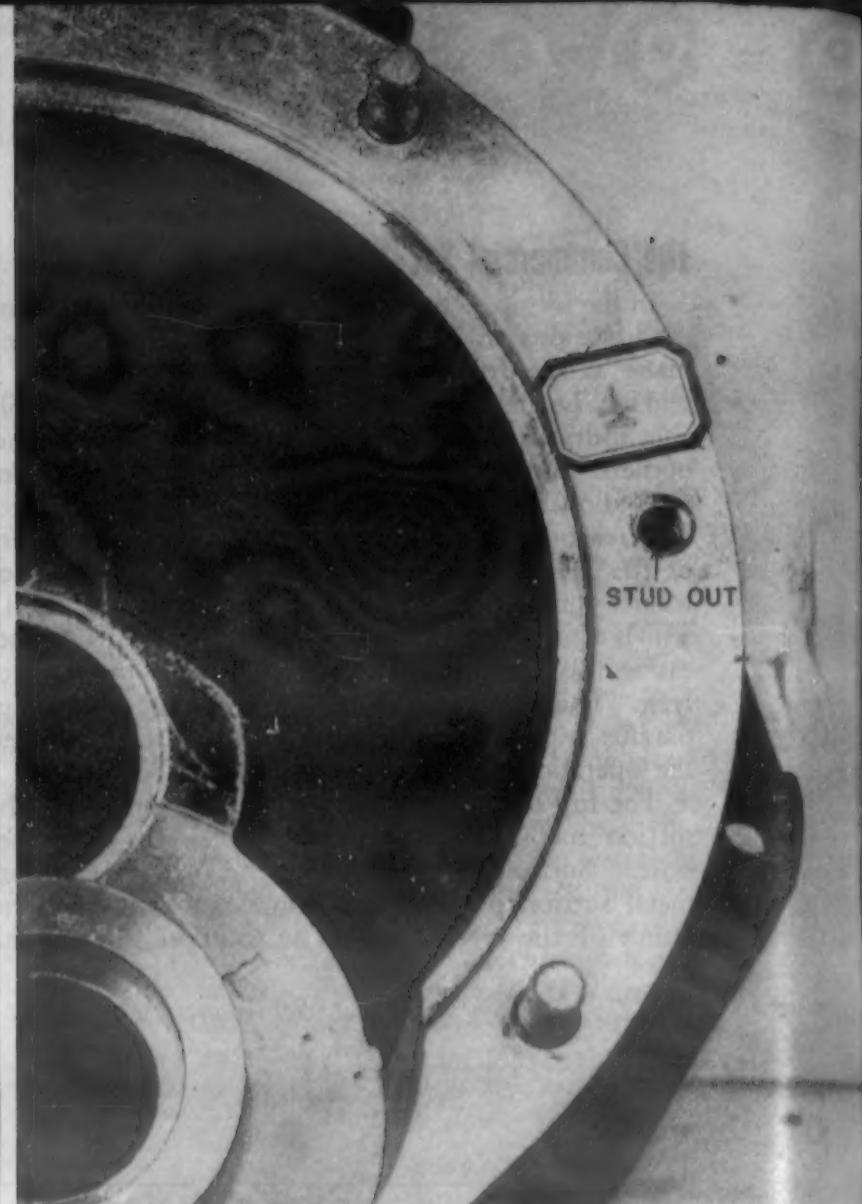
Aluminum casting after the removal of a stud by electrochemical drilling.
